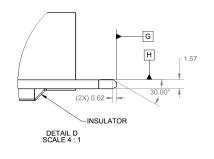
Large Form Factor Keep Out Zone – Side View – Detail D
